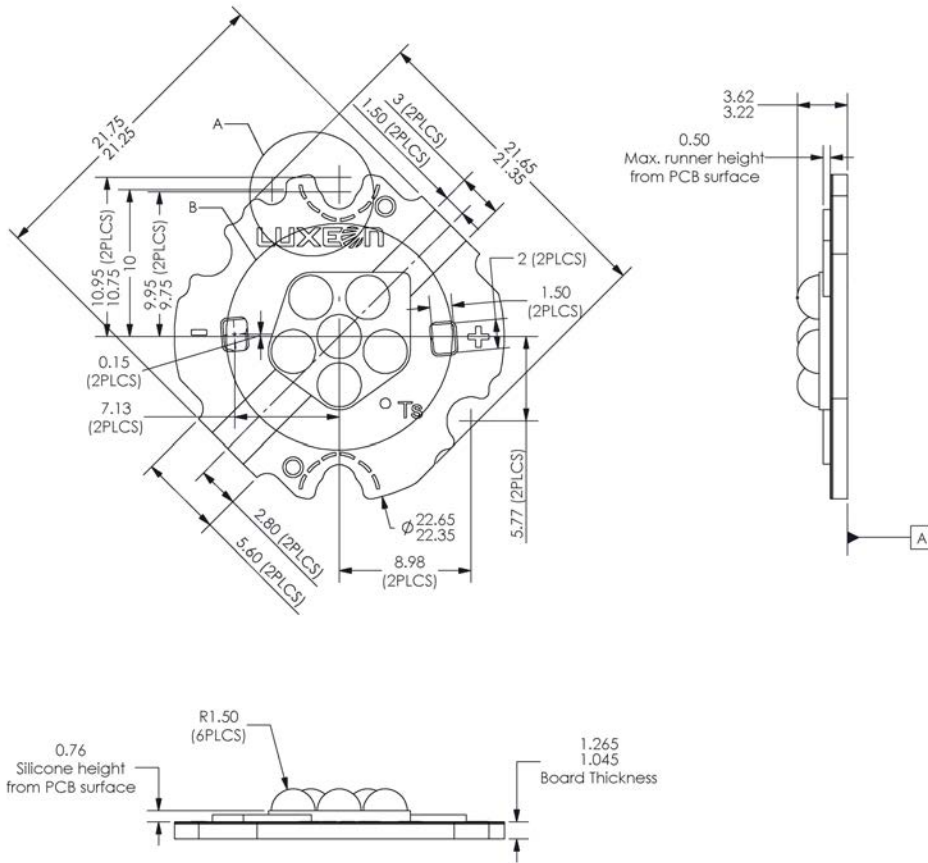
Mechanical Drawings for LXKx-PWxx-0206
